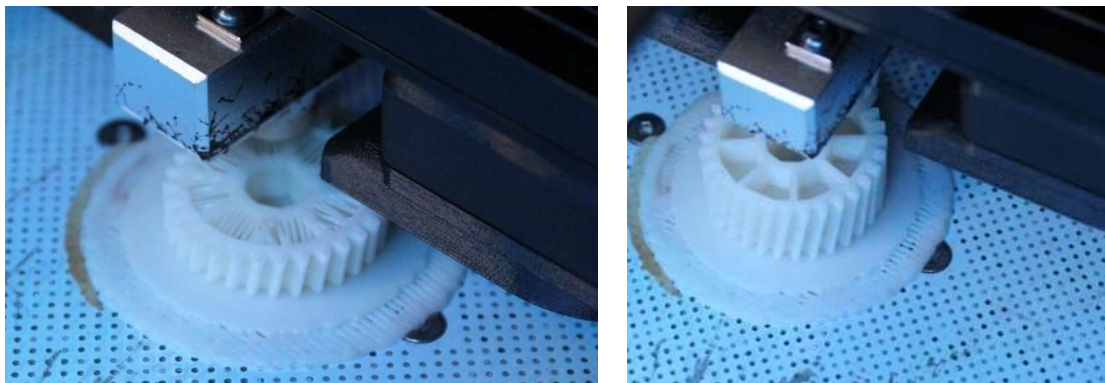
Visualization of the manufacturing process of a reconstructed gear wheel
